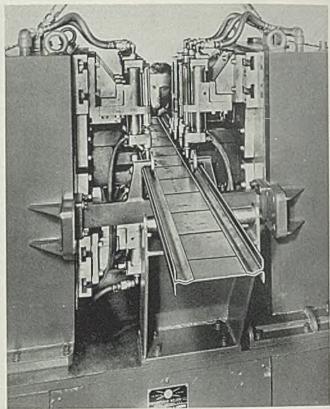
Series of guide and rest rolls align the work during welding, left, while twelve sliding contact guns weld simultaneously
